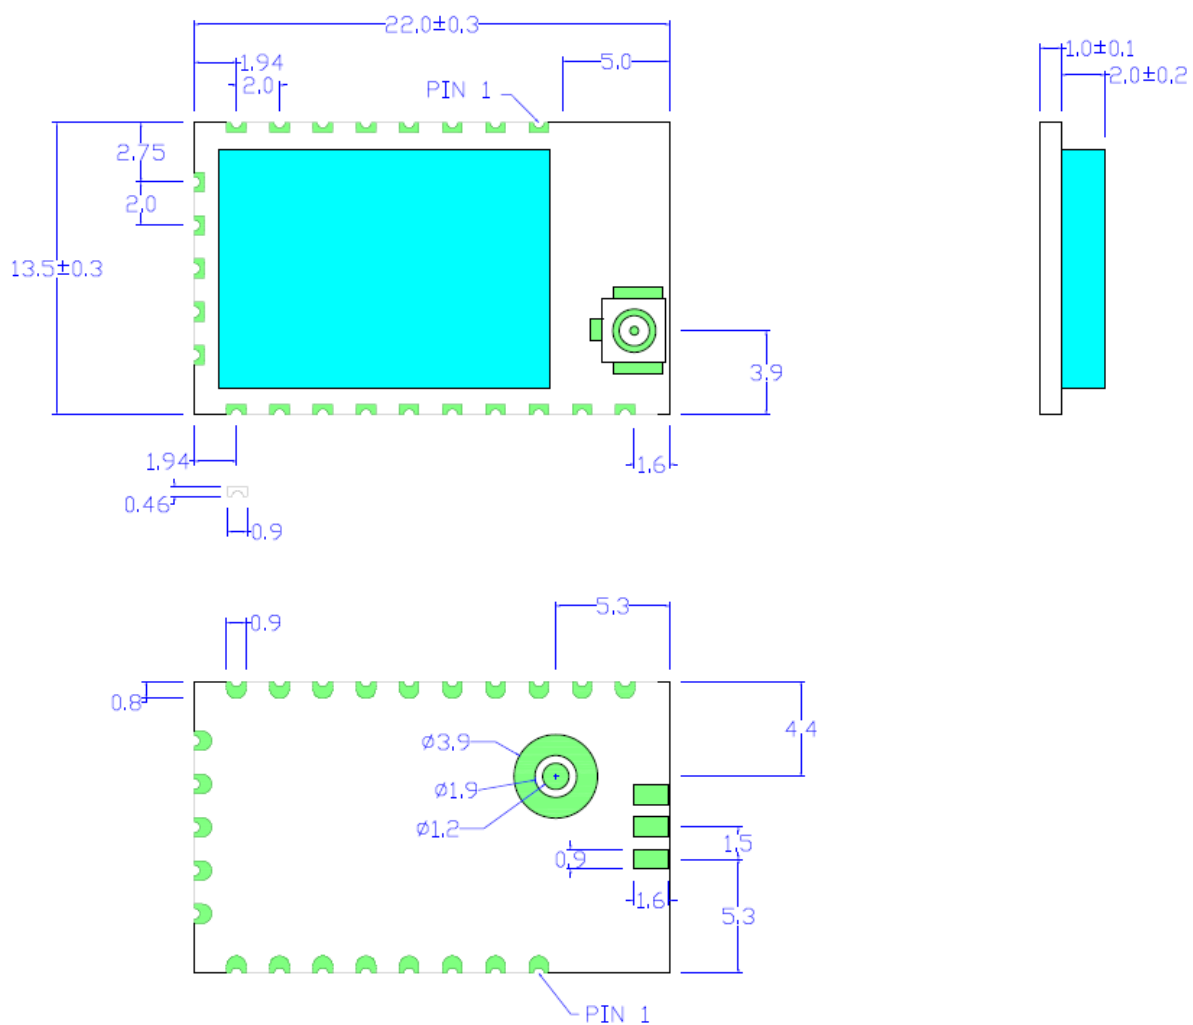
HF-LPT262-0G/2G Mechanical Dimension
